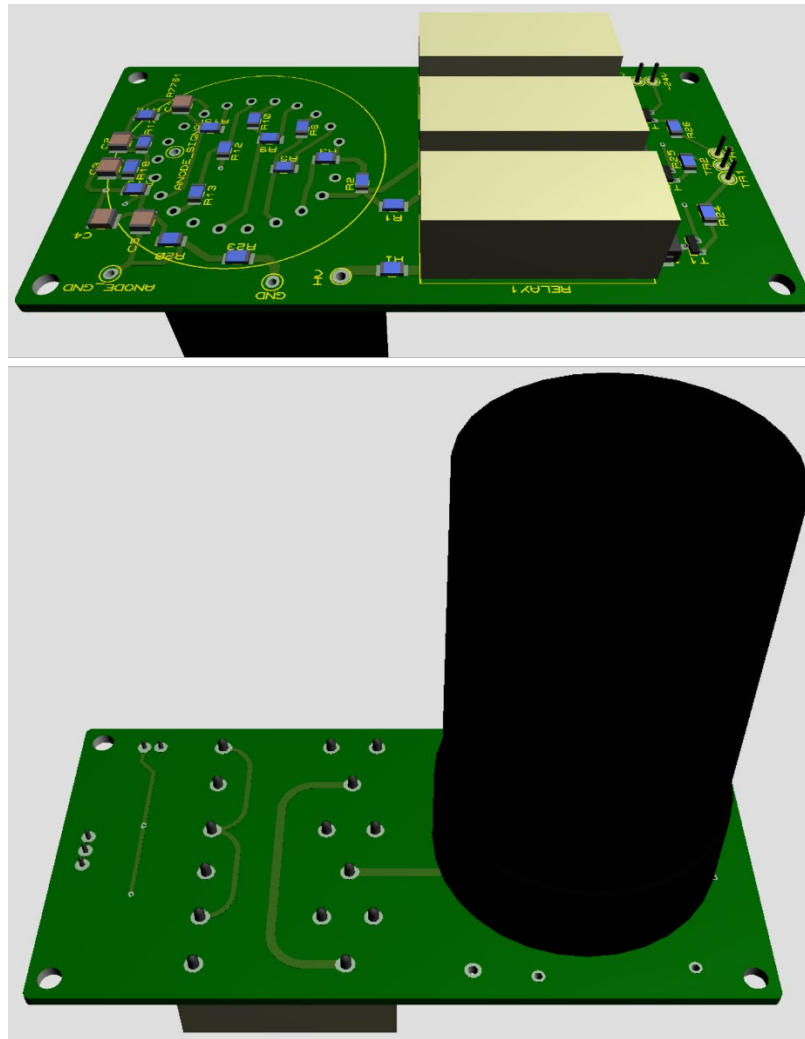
3D view of the top and bottom, respectively, for the remotely controlled R7761 type Photomultiplier tube.
